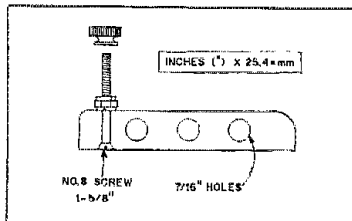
Drill three holes in the side of the block of wood as shown above.
